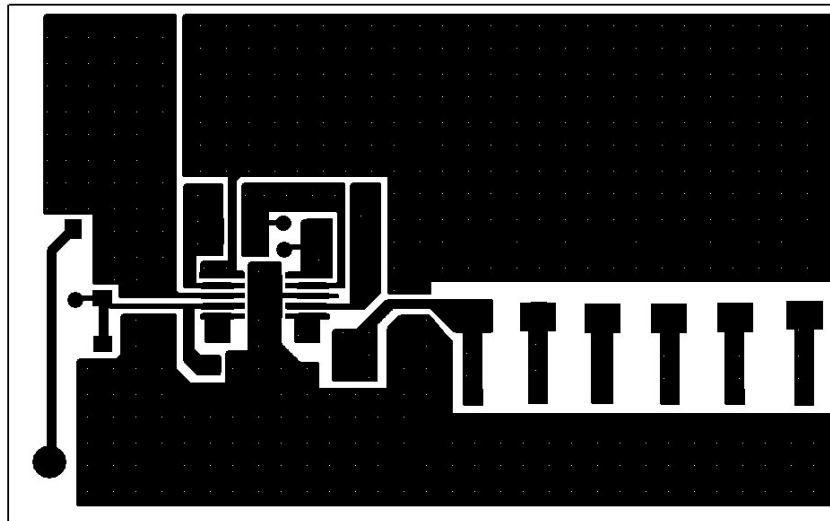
SP6683 PC LAYOUT TOP SIDE
